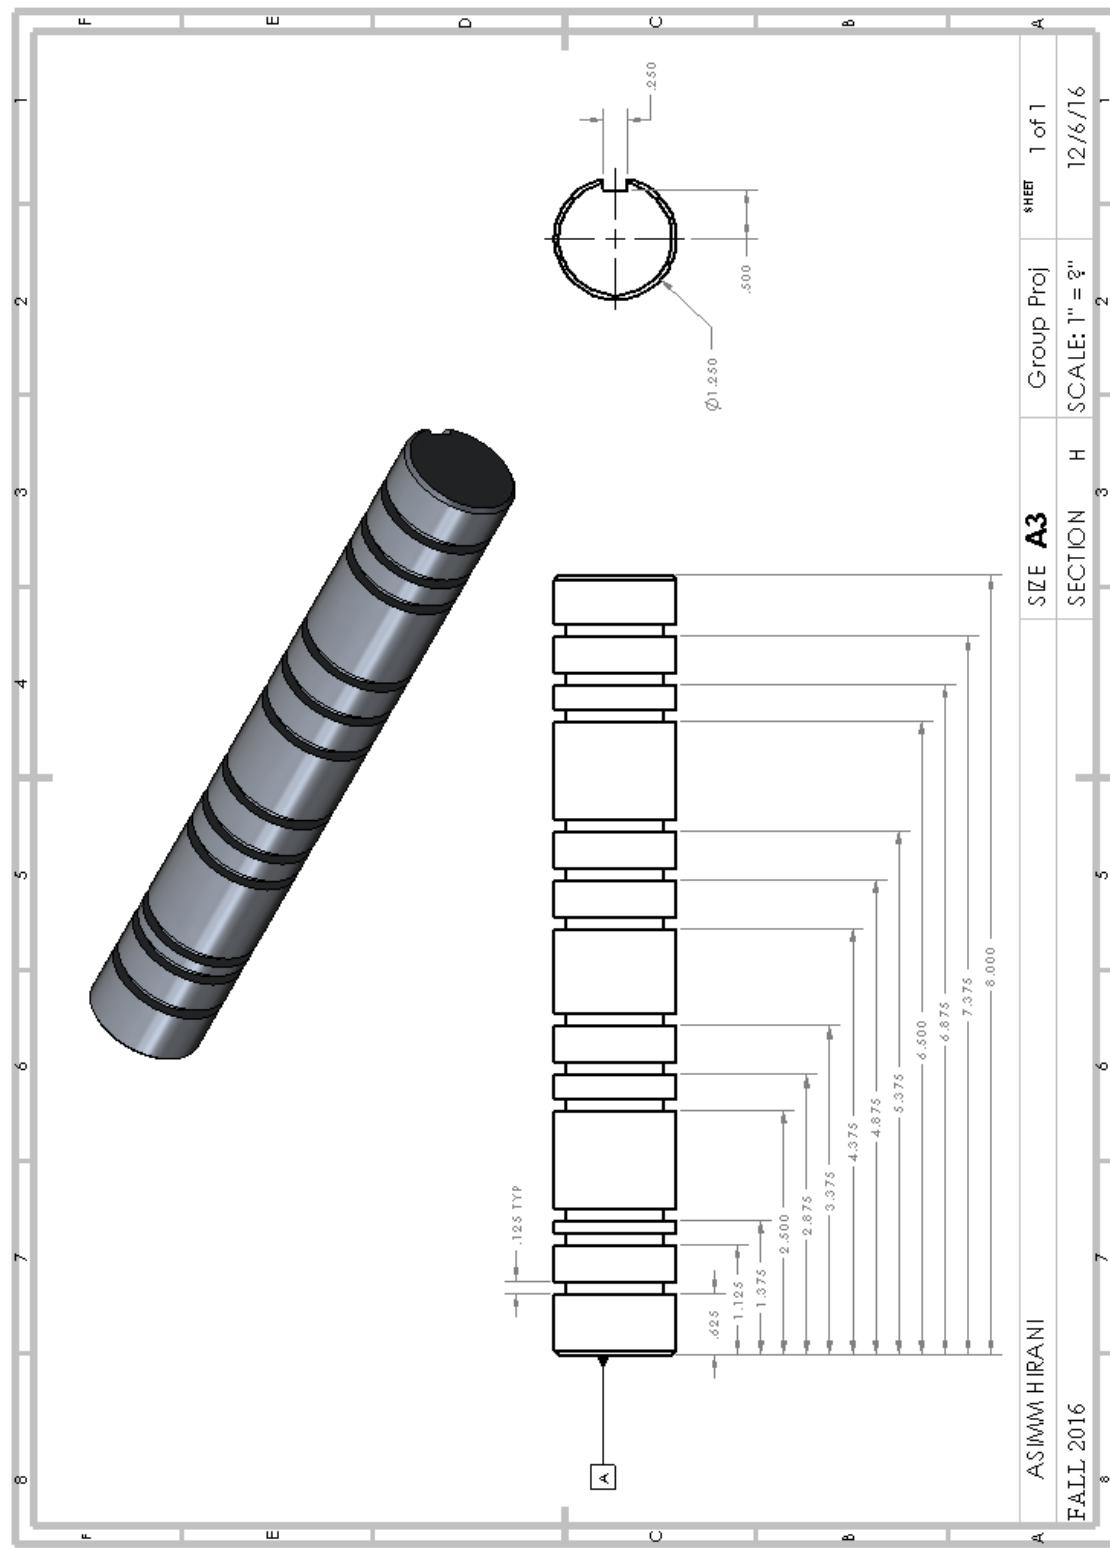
Hirani, Asimm: Gearbox Idler Shaft
